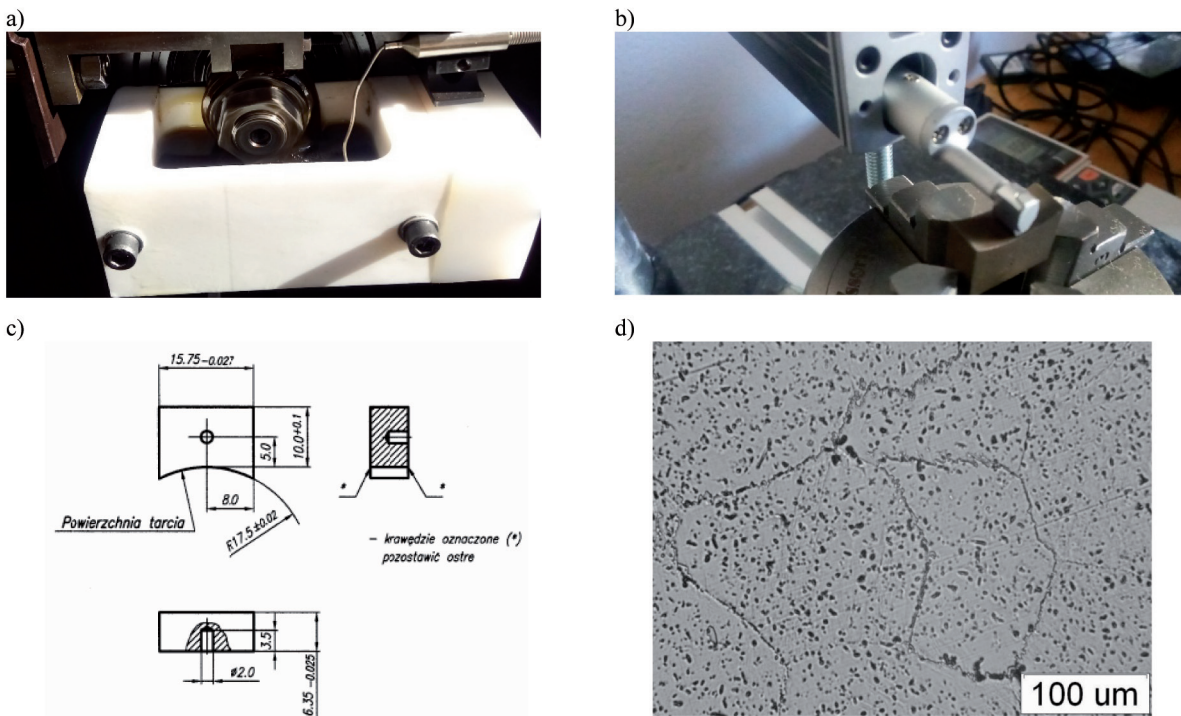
View of a) a friction node on a T-05 stand, b) an example of a surface roughness measurement using a MITUTOYO touch profilometer, c) a drawing with the dimensions of the sample plotted, d) the microstructure of the intermetallic alloy Fe40Al15Cr0.2TiB
